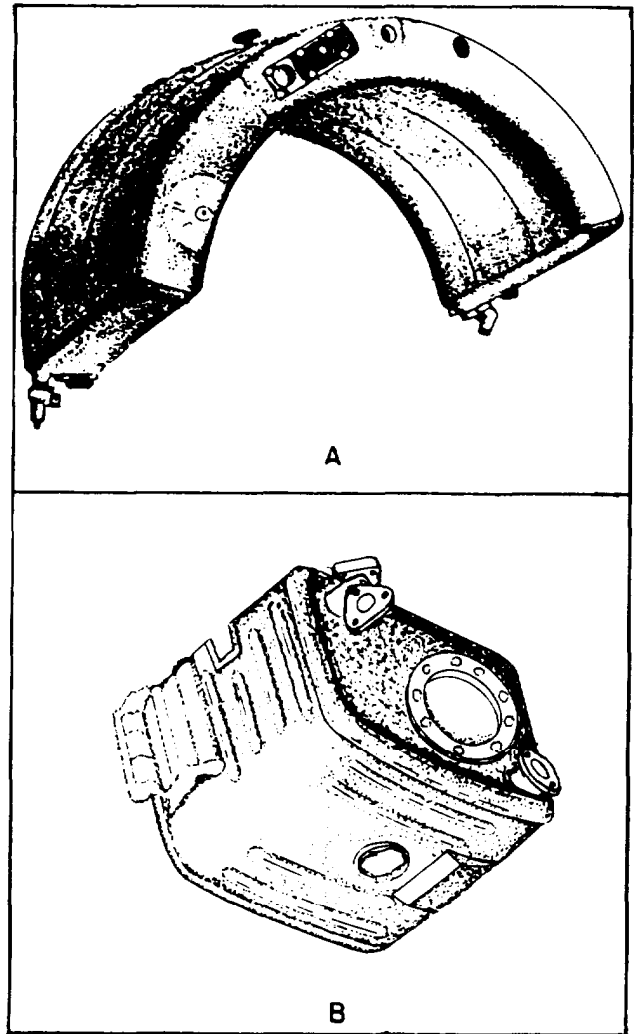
Dry-sump oil tanks; (A) engine mounted; (B) engine or airframe mounted.
